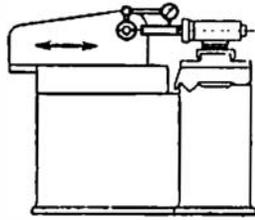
Parallelism between the Spindle Axis and the Direction of the Infeed Movement (Universal Grinding Machines)
